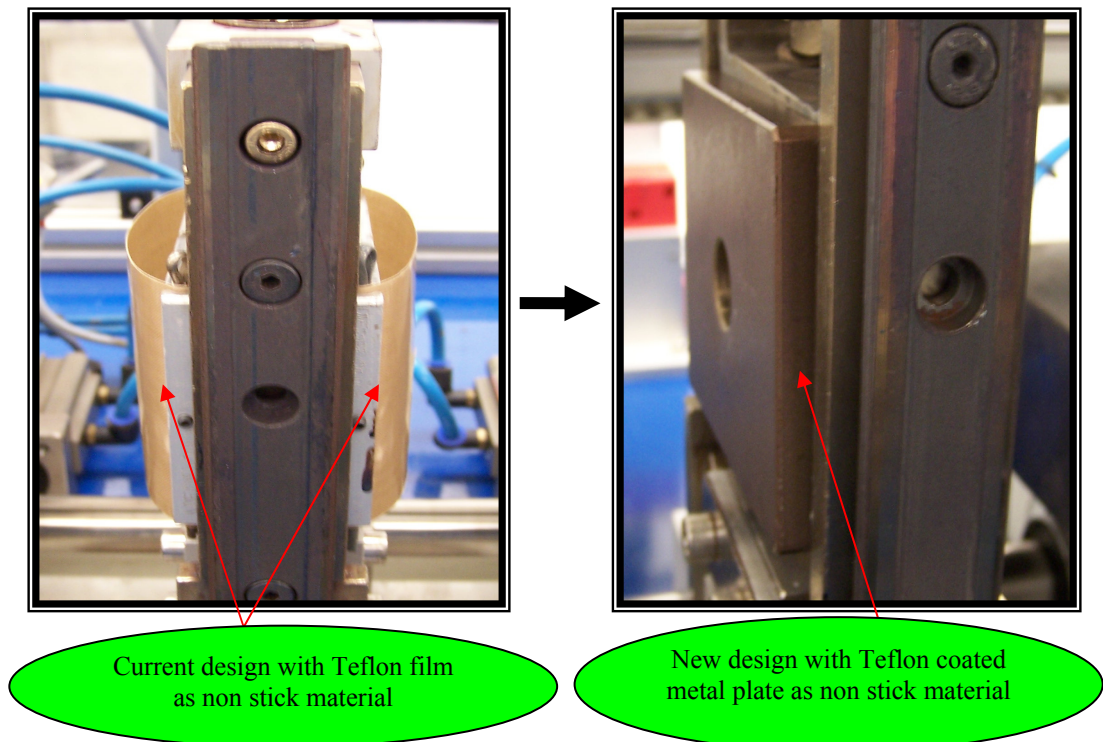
TEFLON coated metal plate as non-stick material for plastic welding
